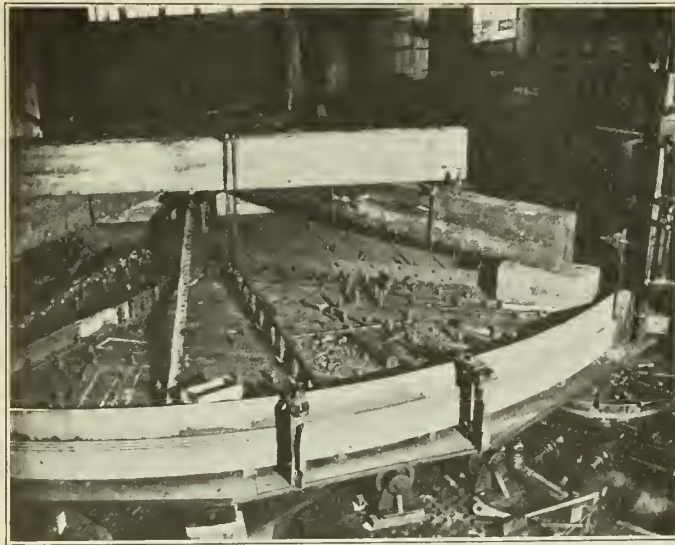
Bridge No. 4—Finishing Segmental Girder.
